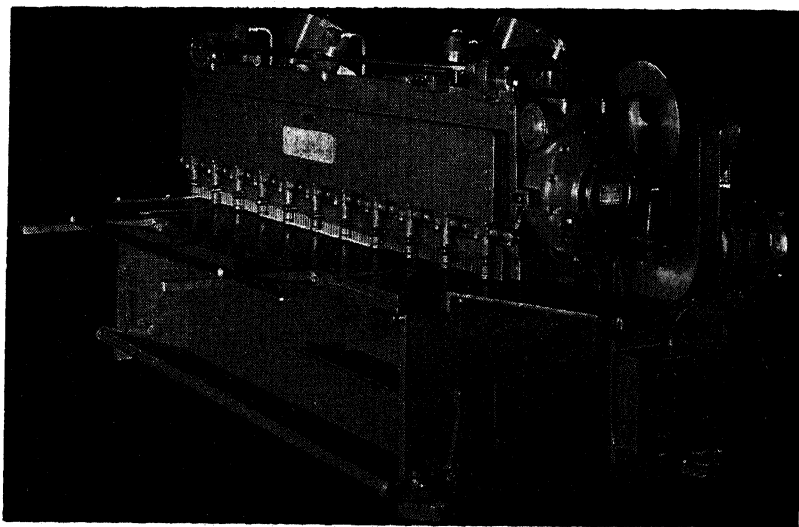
Bed top, drive gear, ram line H beam, housing, press connection, housing feet and gear guards of this 210 series x 15 ft. press brake are of arc welded steel construction.
